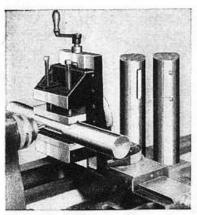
Milling a Keyseat on an 18-inch Lathe
